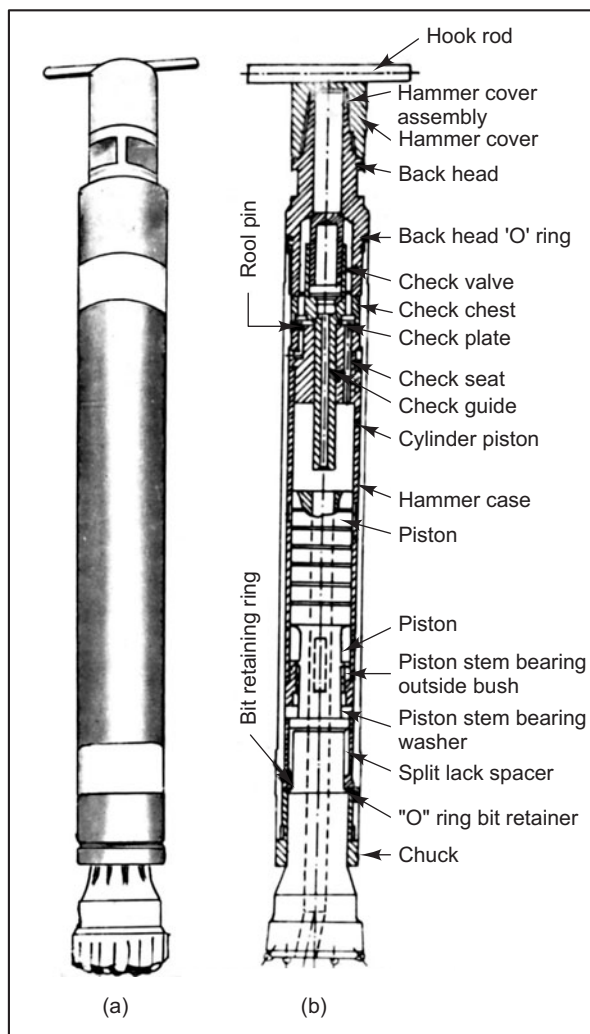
Views of the hammer assembly of down-the-hole drill: (a) General view, (b) Sectional view showing parts
